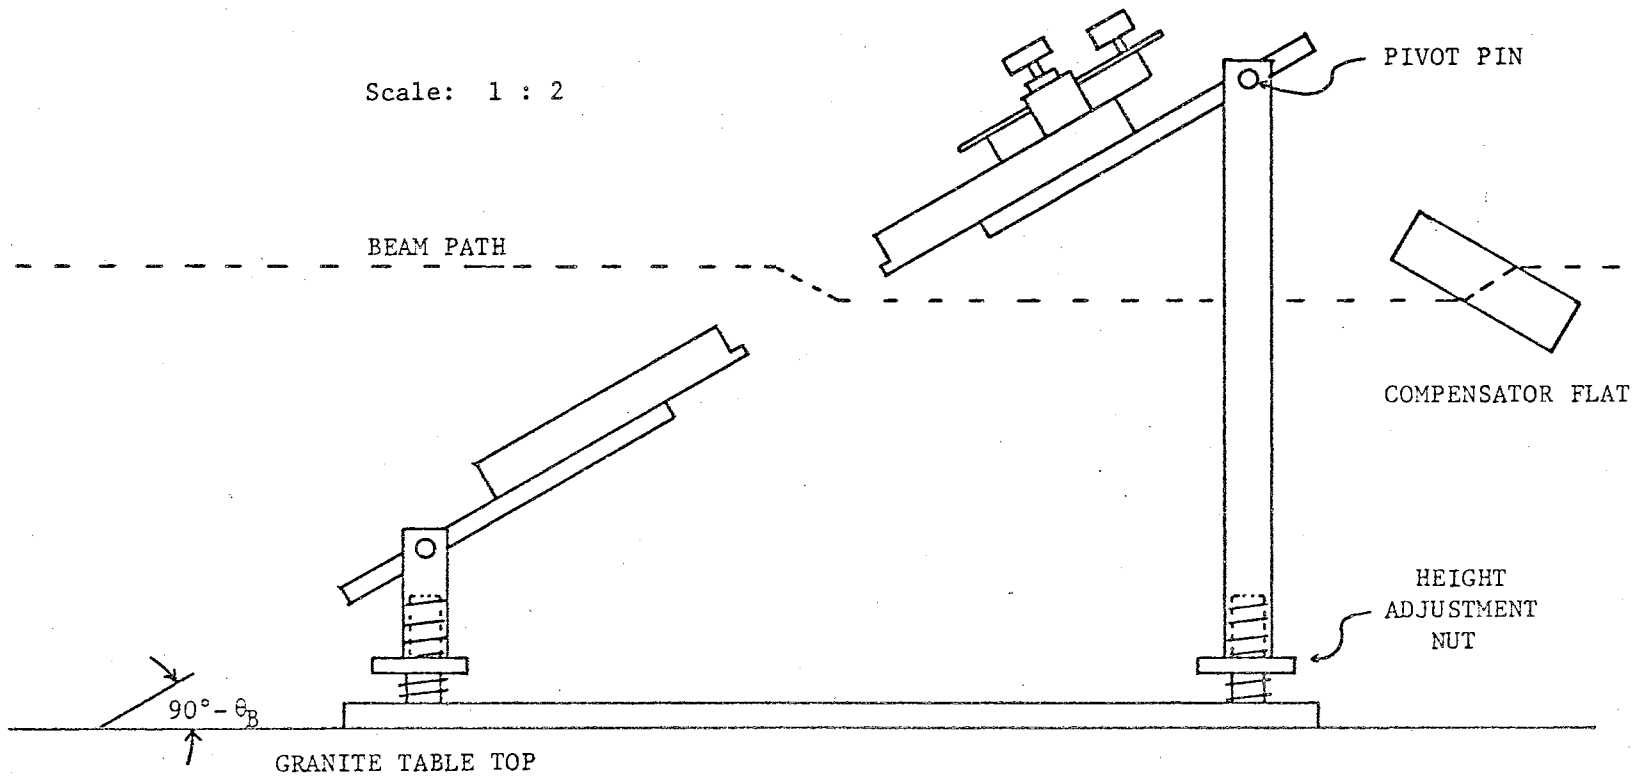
Side View of Adjustable Platform for Holding Moving Medium in Rotator
